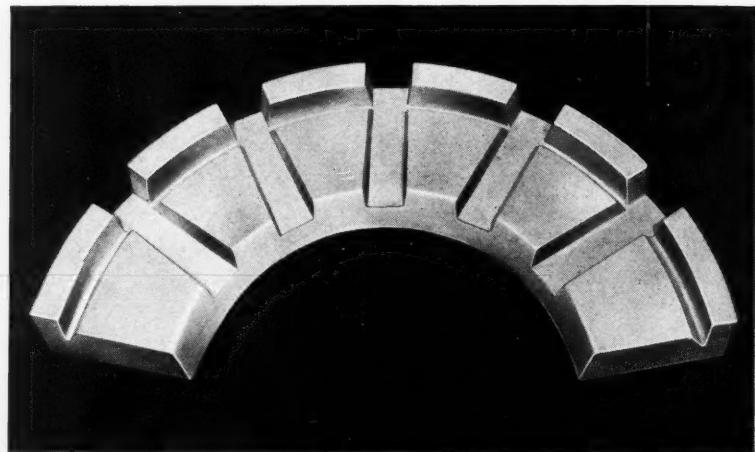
Solid phenolic casting employed as a fuselage former in the production of the F-89 "Scorpion" fighter airplane
